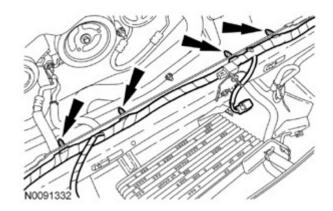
Locating Wiring Harness Retainers And Wiring Harness Aside Courtesy of FORD MOTOR CO.
